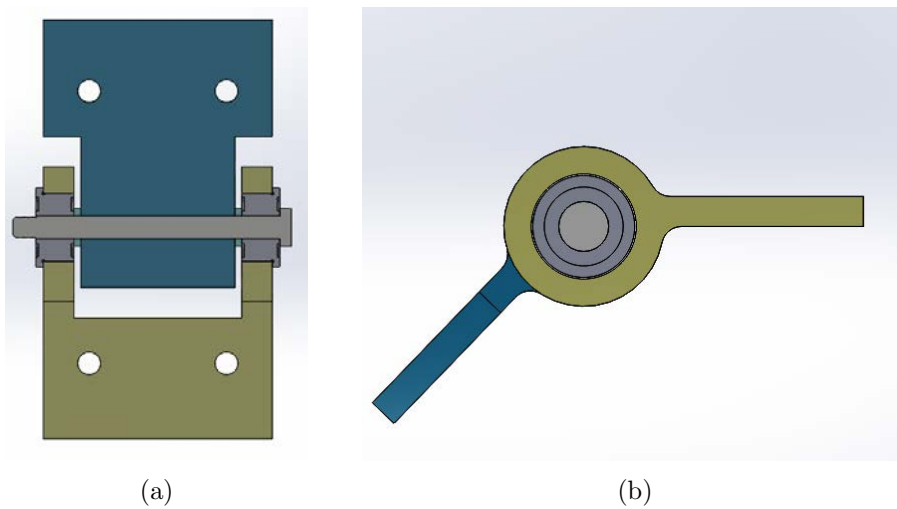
Non-actuated joint (a) Cut through. (b) Side view .
